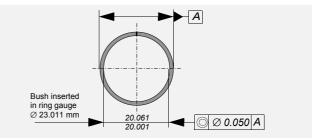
Test C, Data for drawing (example D_i = 20 mm)
